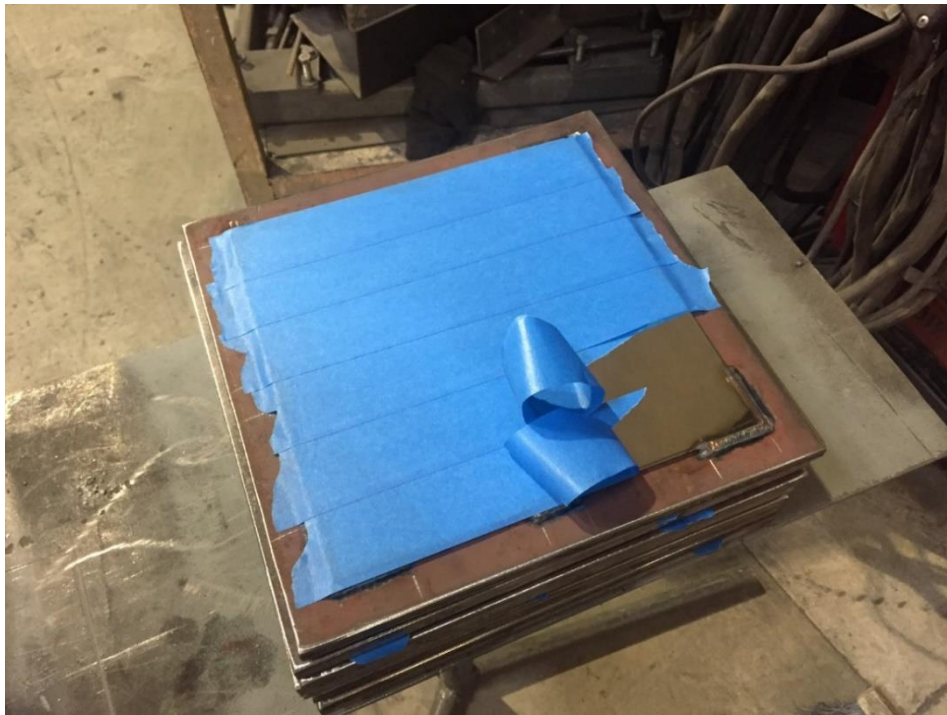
SSN plate with mirror finish welded to the sole plate
